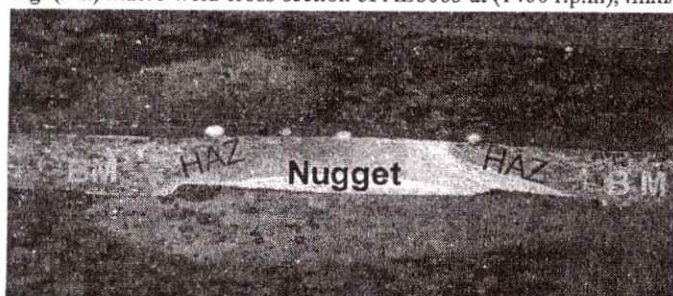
b) macro weld cross-section of AL6063 at (485 r.p.m),4mm/min
